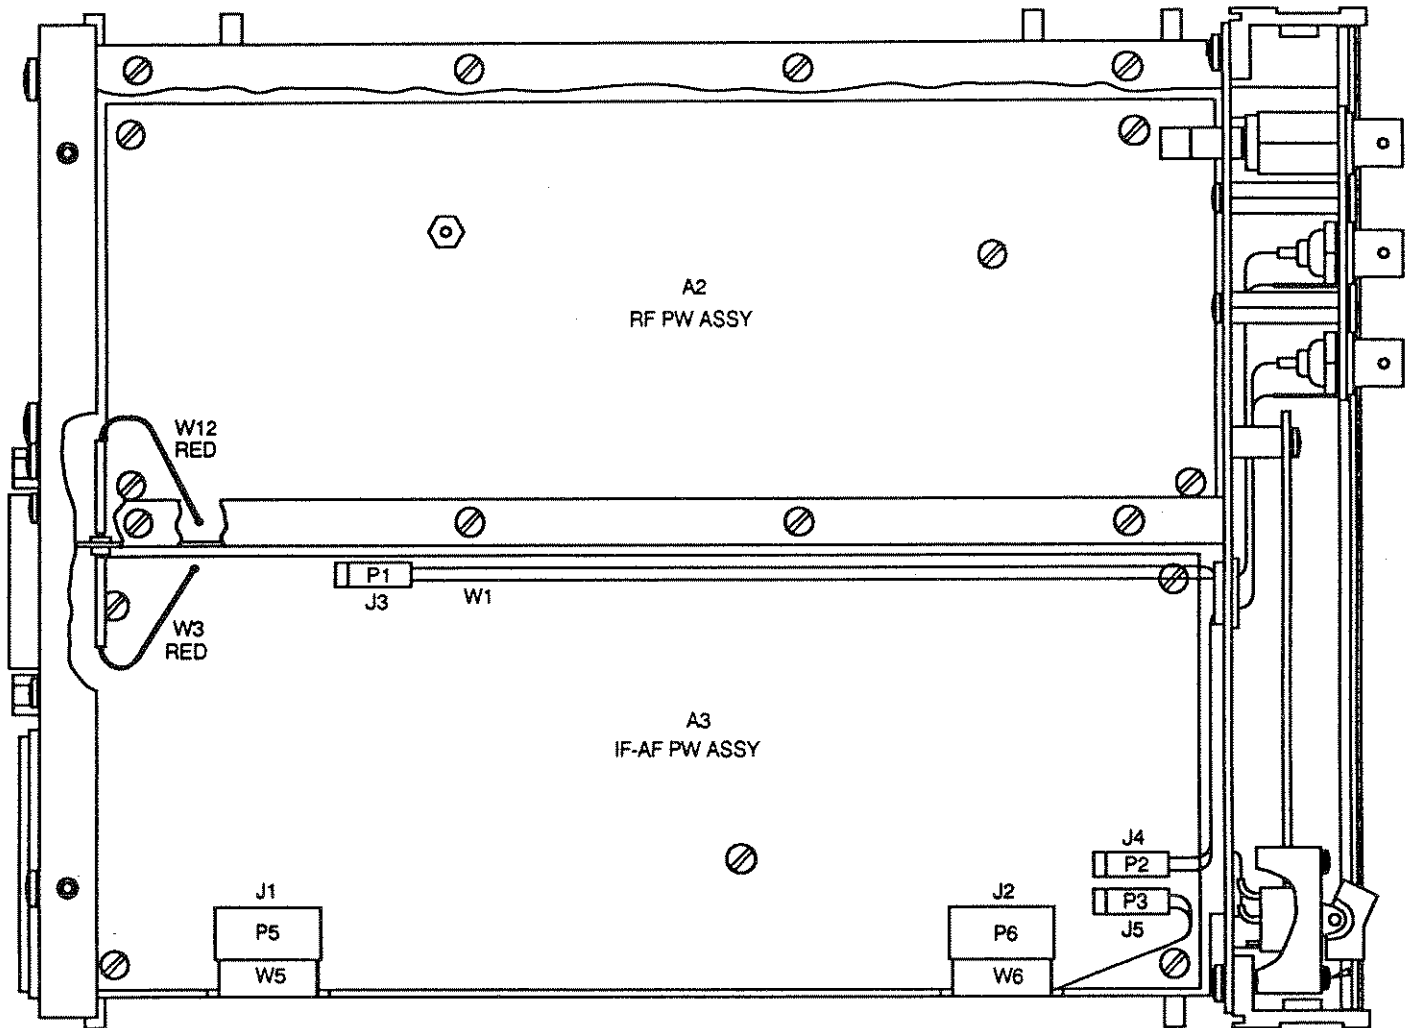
MAJOR ASSEMBLY LOCATION, BOTTOM VIEW.
